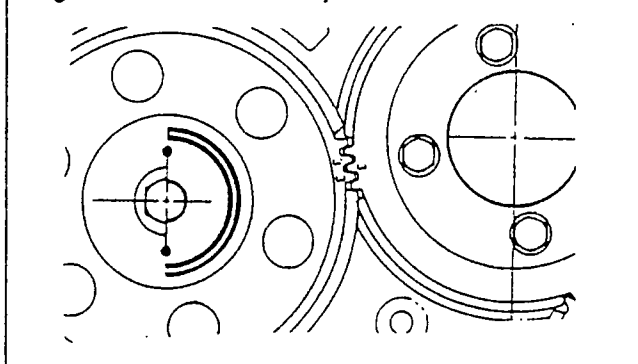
Camshaft Gear to Oil Pump Gear Match Marks
